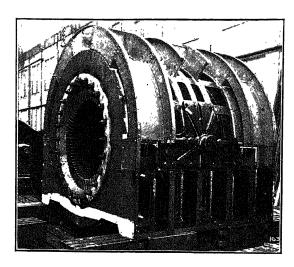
Turbo Generator Stator with Ventilating Outer Skeleton Partly Assembled
